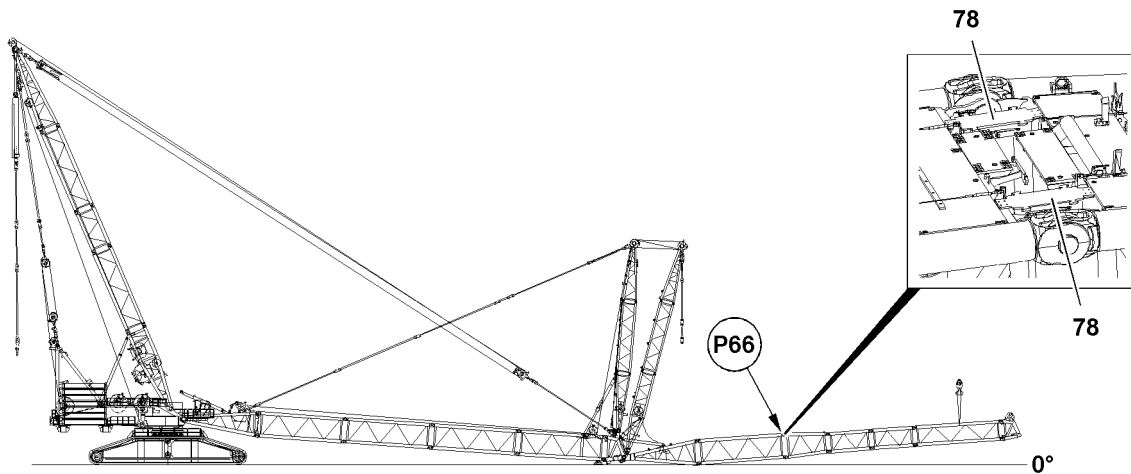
Assembling the W-lattice jib on the W-pivot section — Assembling the rod receptacles
